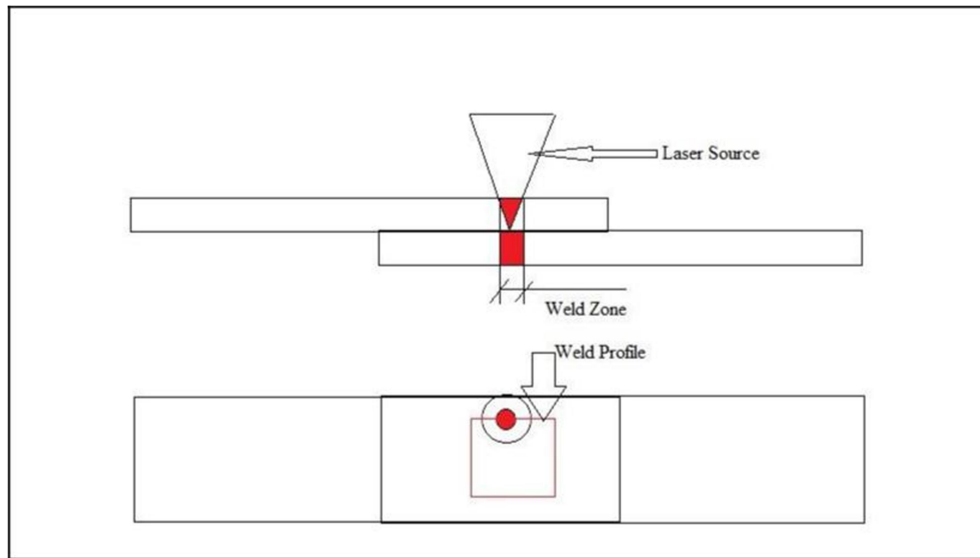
Schematic diagram of laser transmission welding
